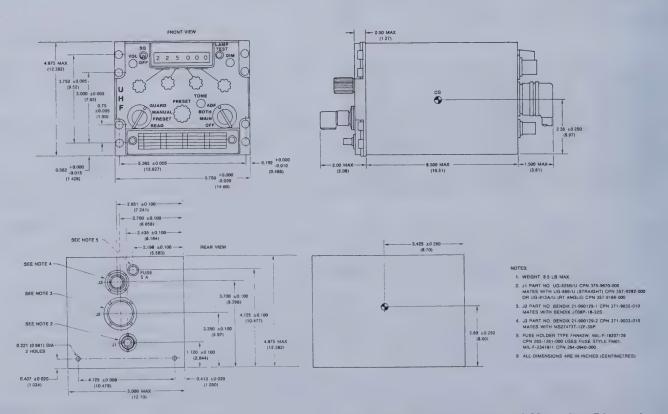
AN/ARC-159(V)1 Radio Set, Outline and Mounting Dimensions
